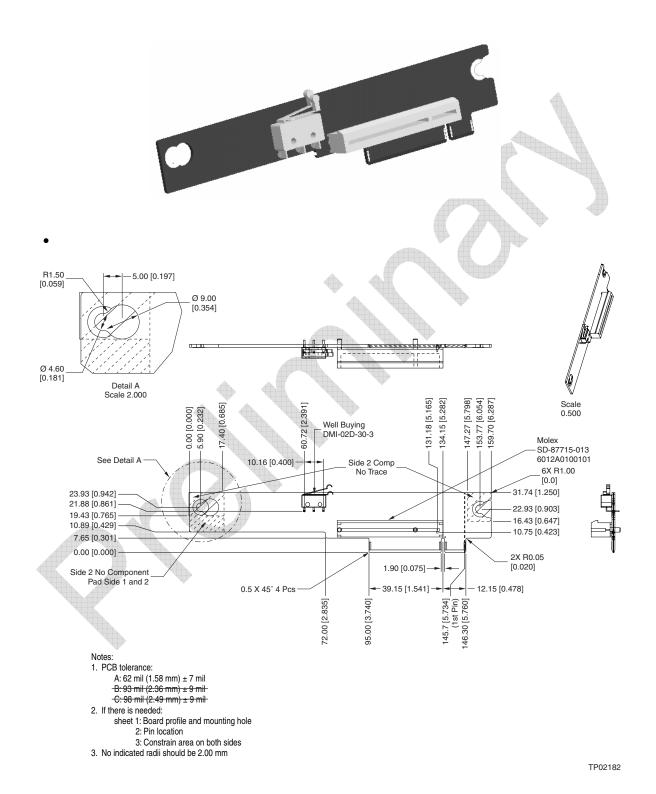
1U Low Profile PCI-X* Riser Card Mechanical Drawing
